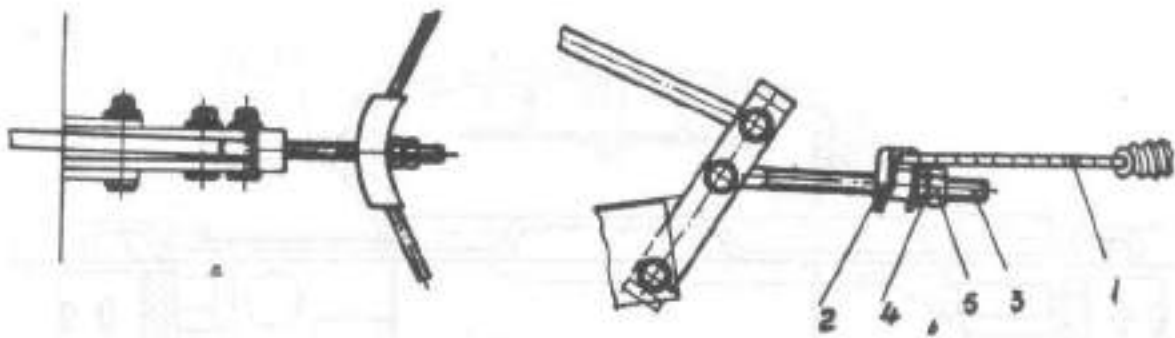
41. BOWDEN CABLE TENSION ADJUSTING SYSTEM FOR HAND BRAKE CONTROL.
